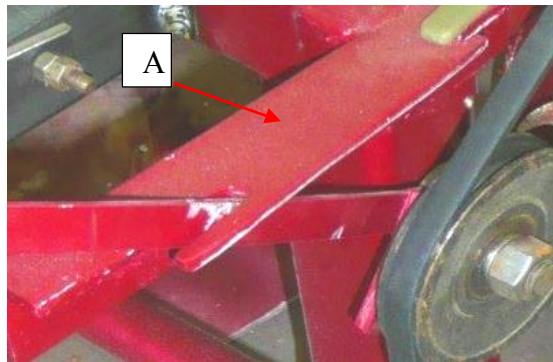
V-belt Drive System Handle Bracket. A) place holder
